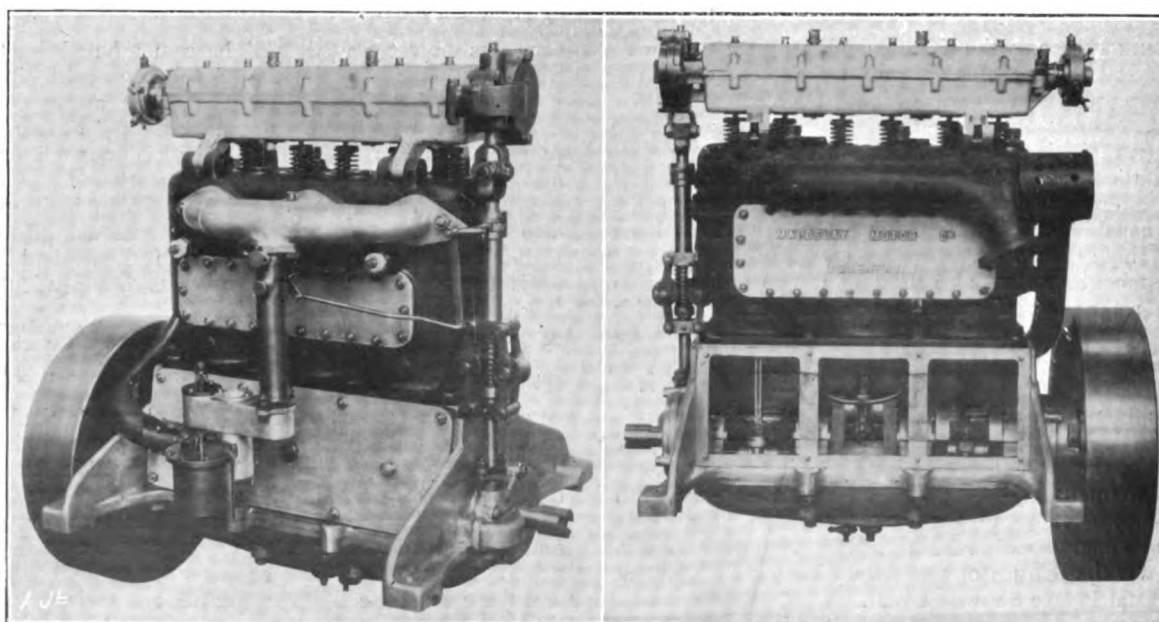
Two views of a 3-Cylinder, Maudslay, Petrol Engine, showing the arrangement of the Valves and the Cam-Shaft above the Cylinder-Casting, and also demonstrating the accessibility to the Crank-Chamber.
